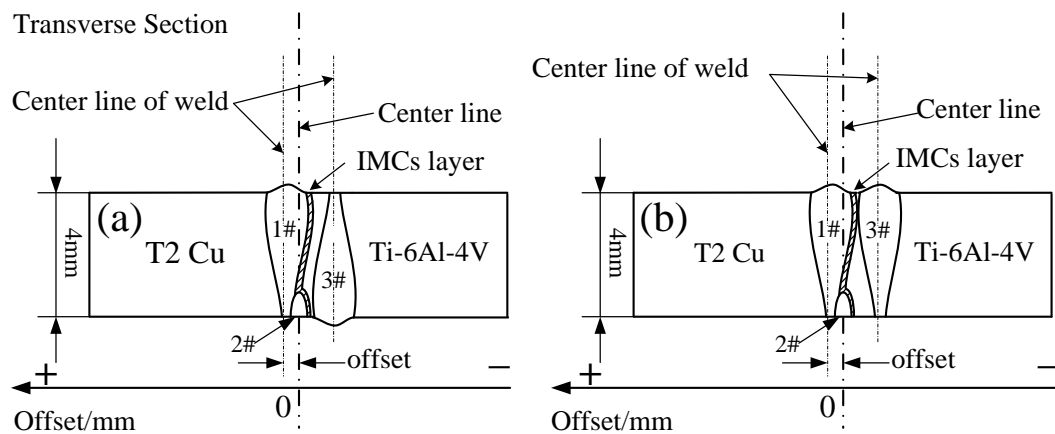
Two types of transverse sections of weld seam due to different welding direction: positive offset means beam is focused on copper plate and negative offset means beam is focused on titanium plate.
